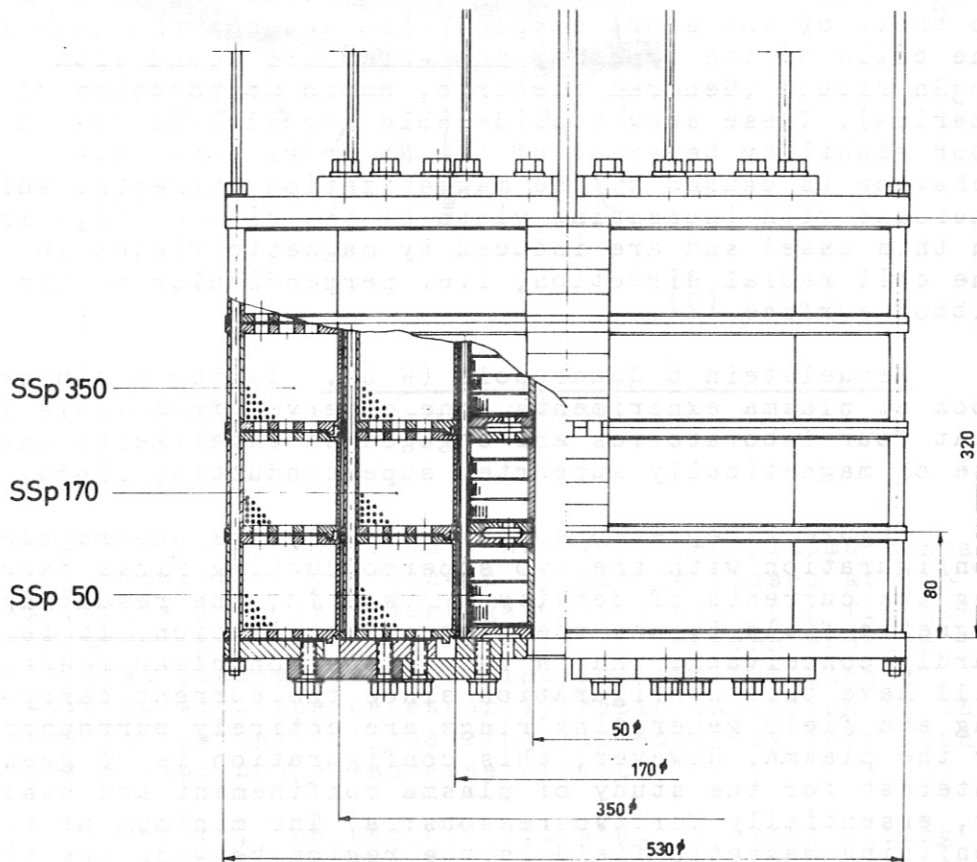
Assembly of twelve superconducting coils SSp 350, SSp 170, and SSp 50 (four of each) forming a 100 kOe magnet system.
